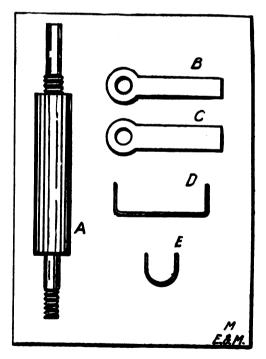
THE COMPONENT PARTS OF THE ELECTRIC FIRING DEVICE
